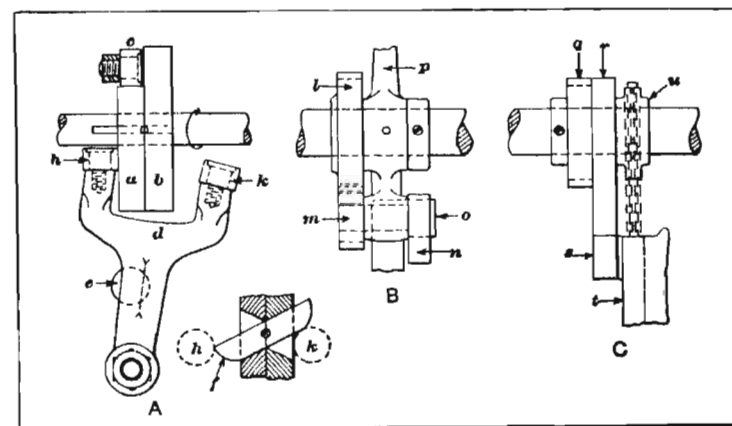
(A) Double-shifting Cam; (B) Lever Vibrated from Shaft on which it is Fulcrumed; (C) Shaft Oscillated by Cam Located on it
